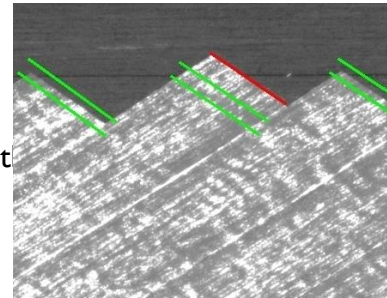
This piece of backing paper was illuminated by laser to enable it to be seen by the next ply being put in place. Image courtesy of Assembly Guidance.
